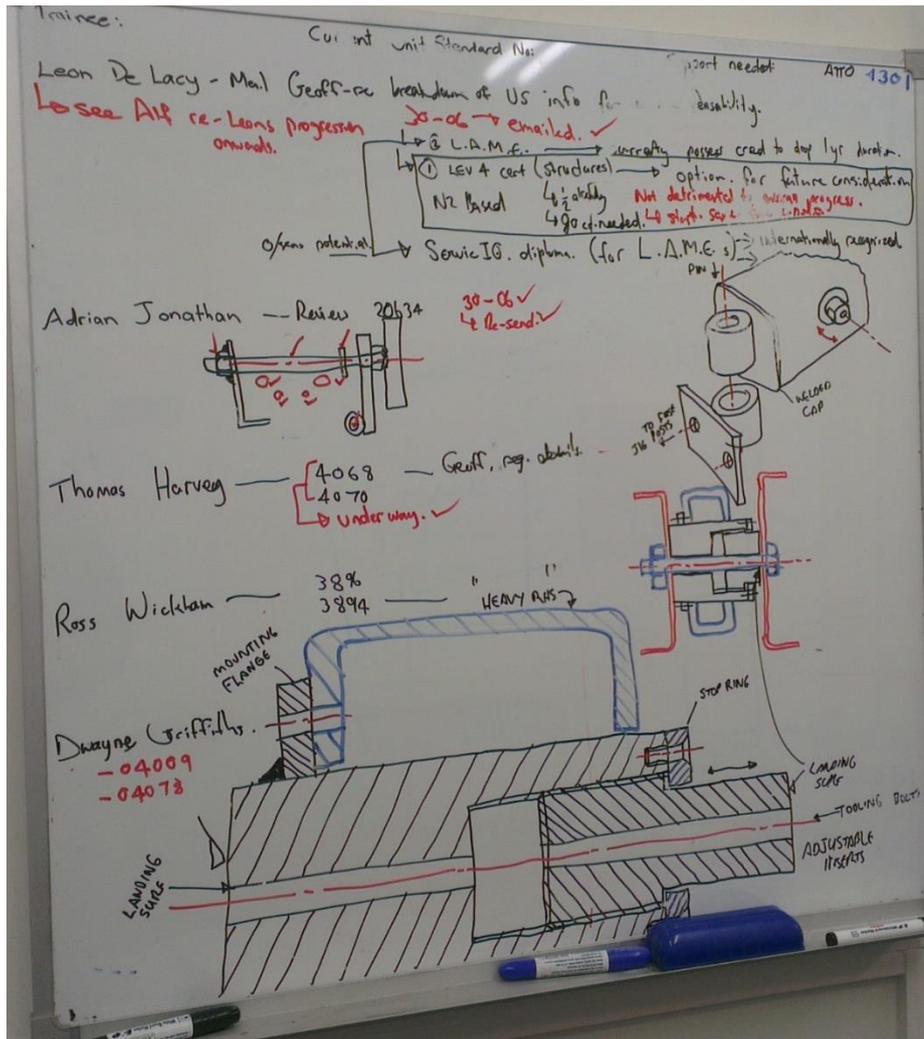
Pretechnological Drawing Showing Possible Solutions
